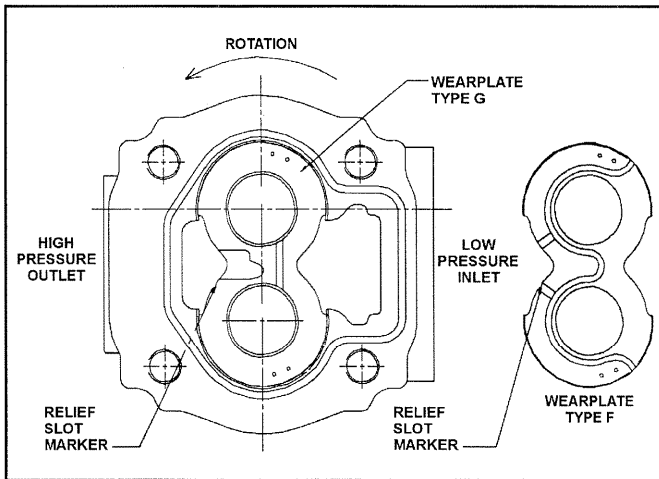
Wearplate Assembly - Counter-Clockwise Rotation
